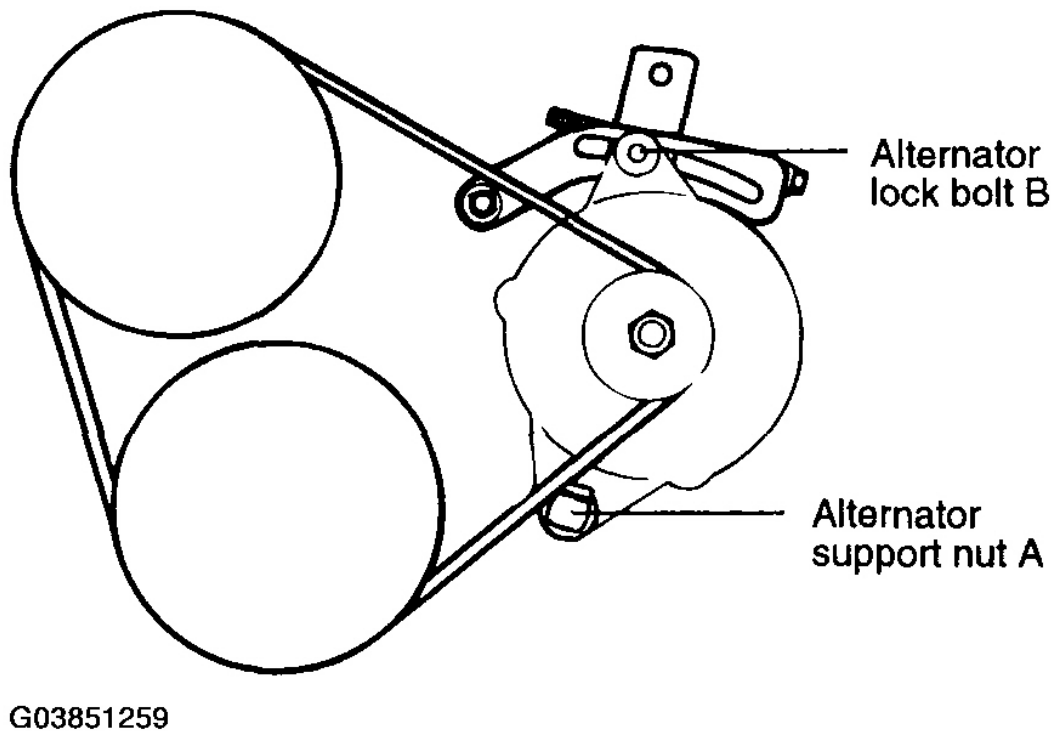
Tightening Adjuster Lock Bolt "B" And Alternator Nut "A"
